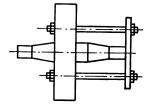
Arrangement for mounting the rotor on the shaft
